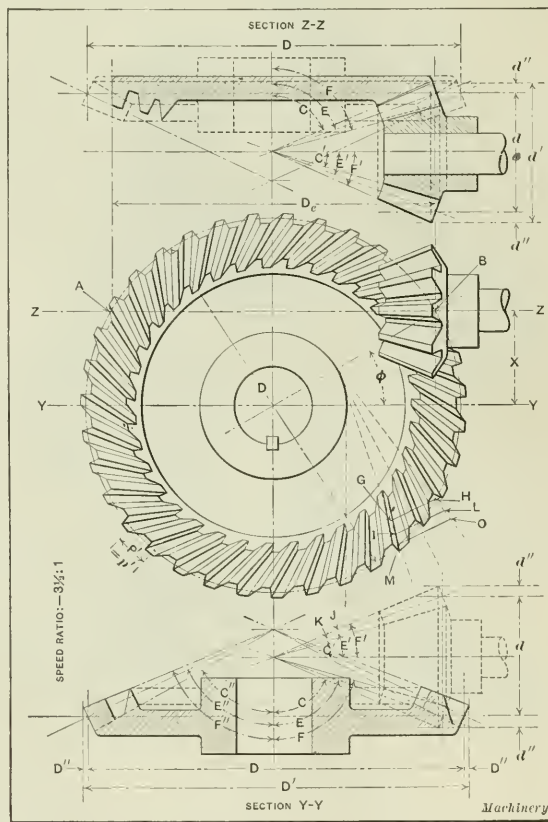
Diagram showing Principles involved in Lay-out of Type A Skew Bevel Gears, in which Ordinary Bevel Pinion meshes with Skew Bevel Gear
